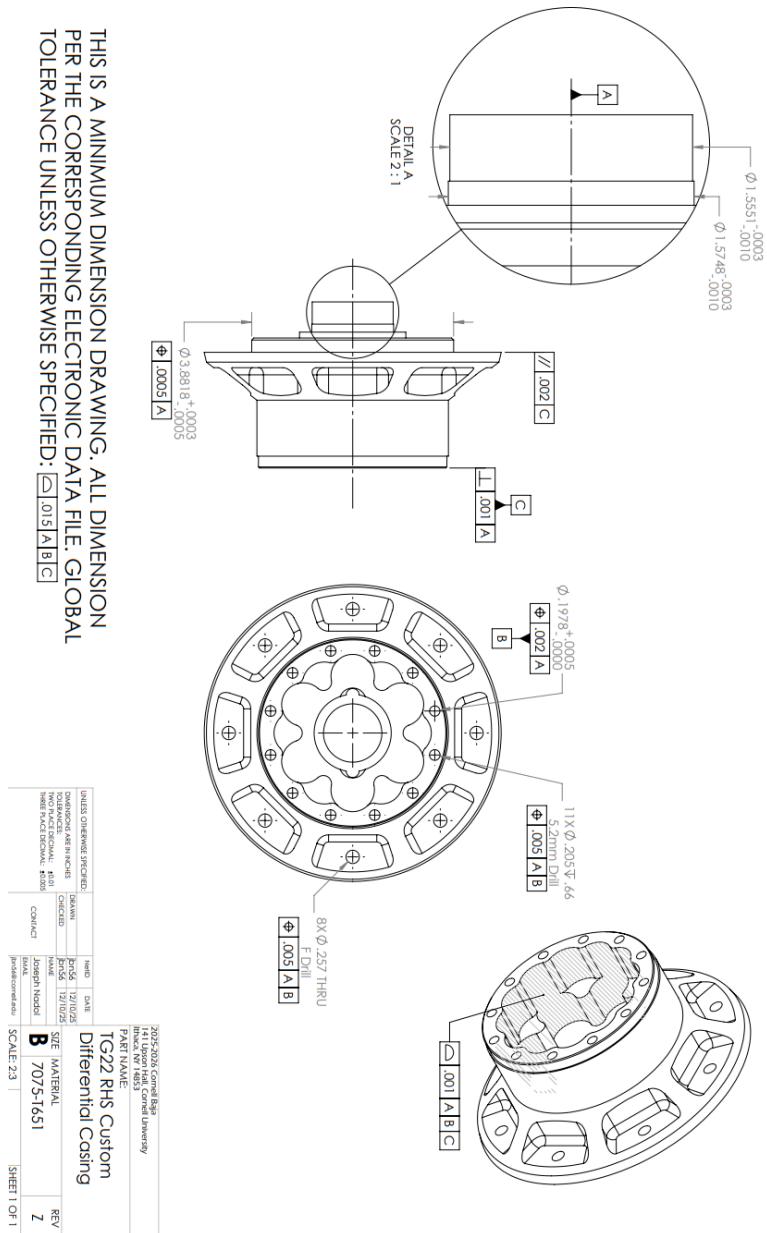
GD&T Drawing for the right-hand casing side. Datums defined as part centerline, locating pin, and mating surface. Important features controlled: bolt pattern, surface profile of the sleeving press, SpeediSleeve press, parallelism of ring gear carrier, concentricity feature for ring gear location.
